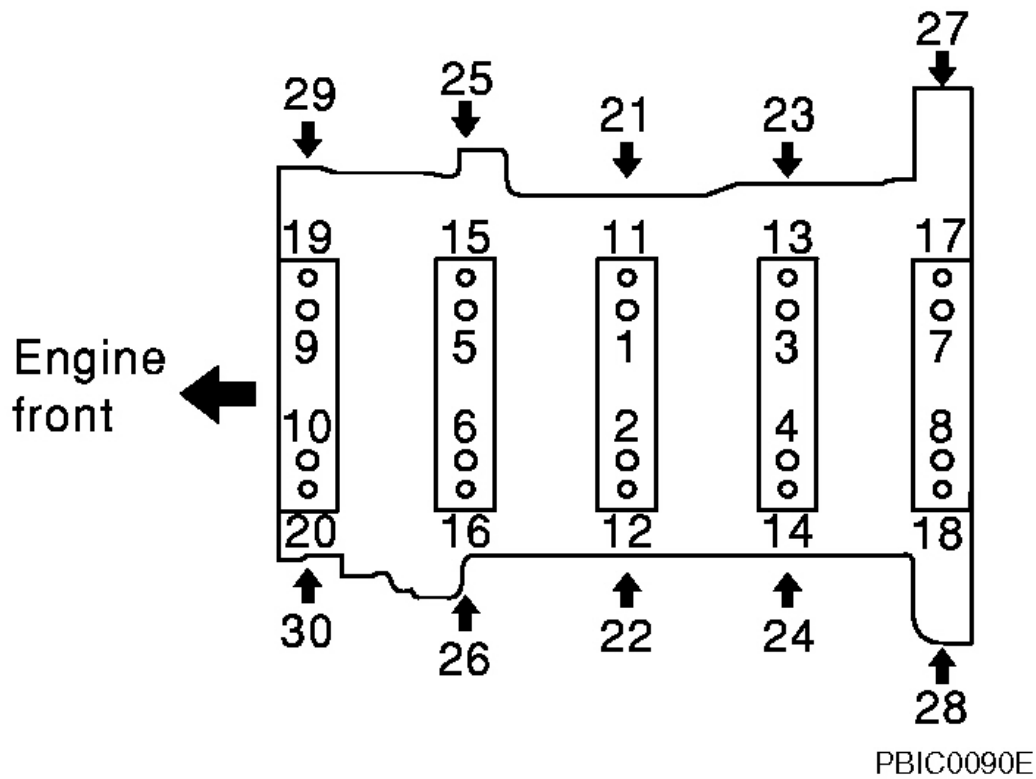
Applying Engine Oil To Threads And Seating Surface Of Main Bearing Cap Bolts And Tighten Bolts
